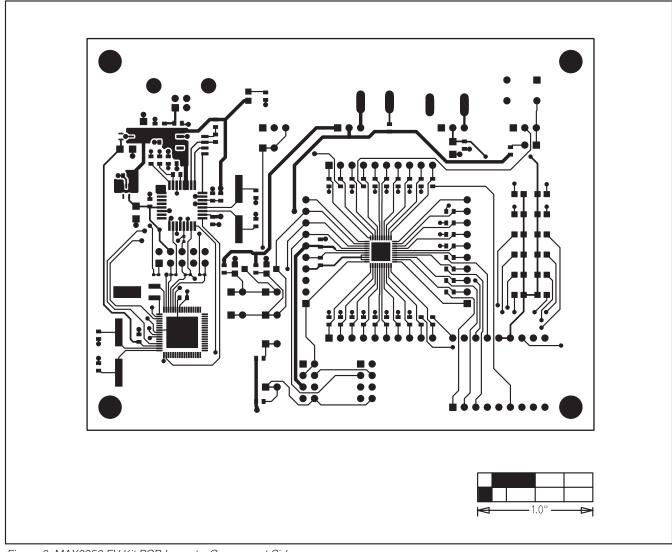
MAX6956 EV Kit PCB Layout—Component Side
